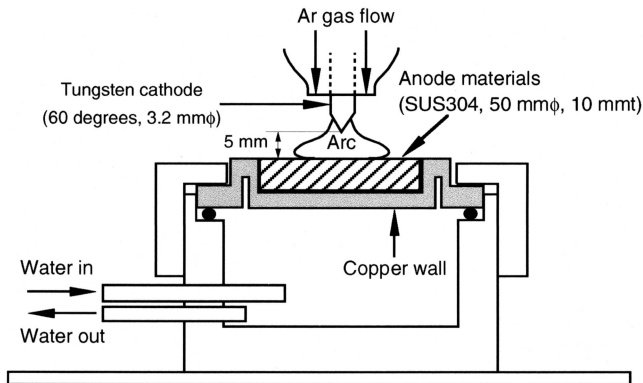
Schematic illustration of the apparatus for stationary TIG welding of SUS304.
